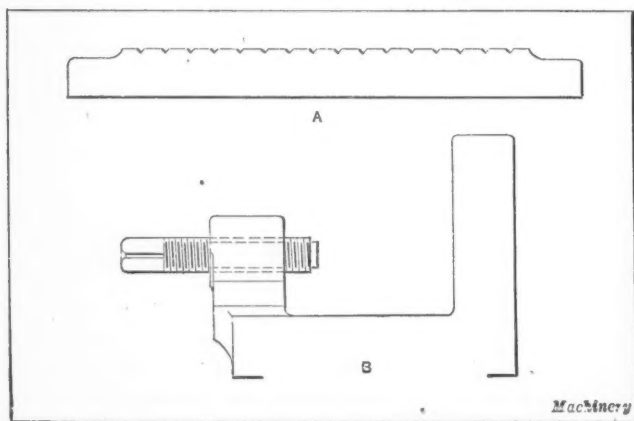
(A) Grooves provided on Grinder Table to remove Dirt from Supporting Surface; (B) Arrangement employed for clamping Rails on Drilling Machine Table
